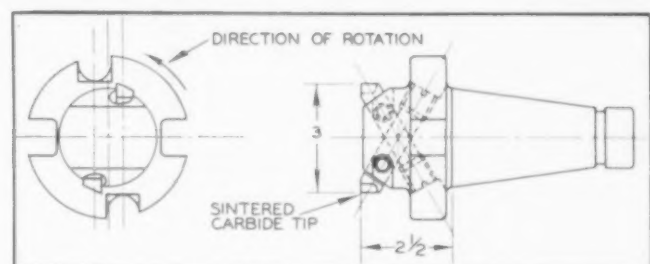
Special two-tooth end mill designed for milling magnesium alloys with sintered carbide cutting material.
